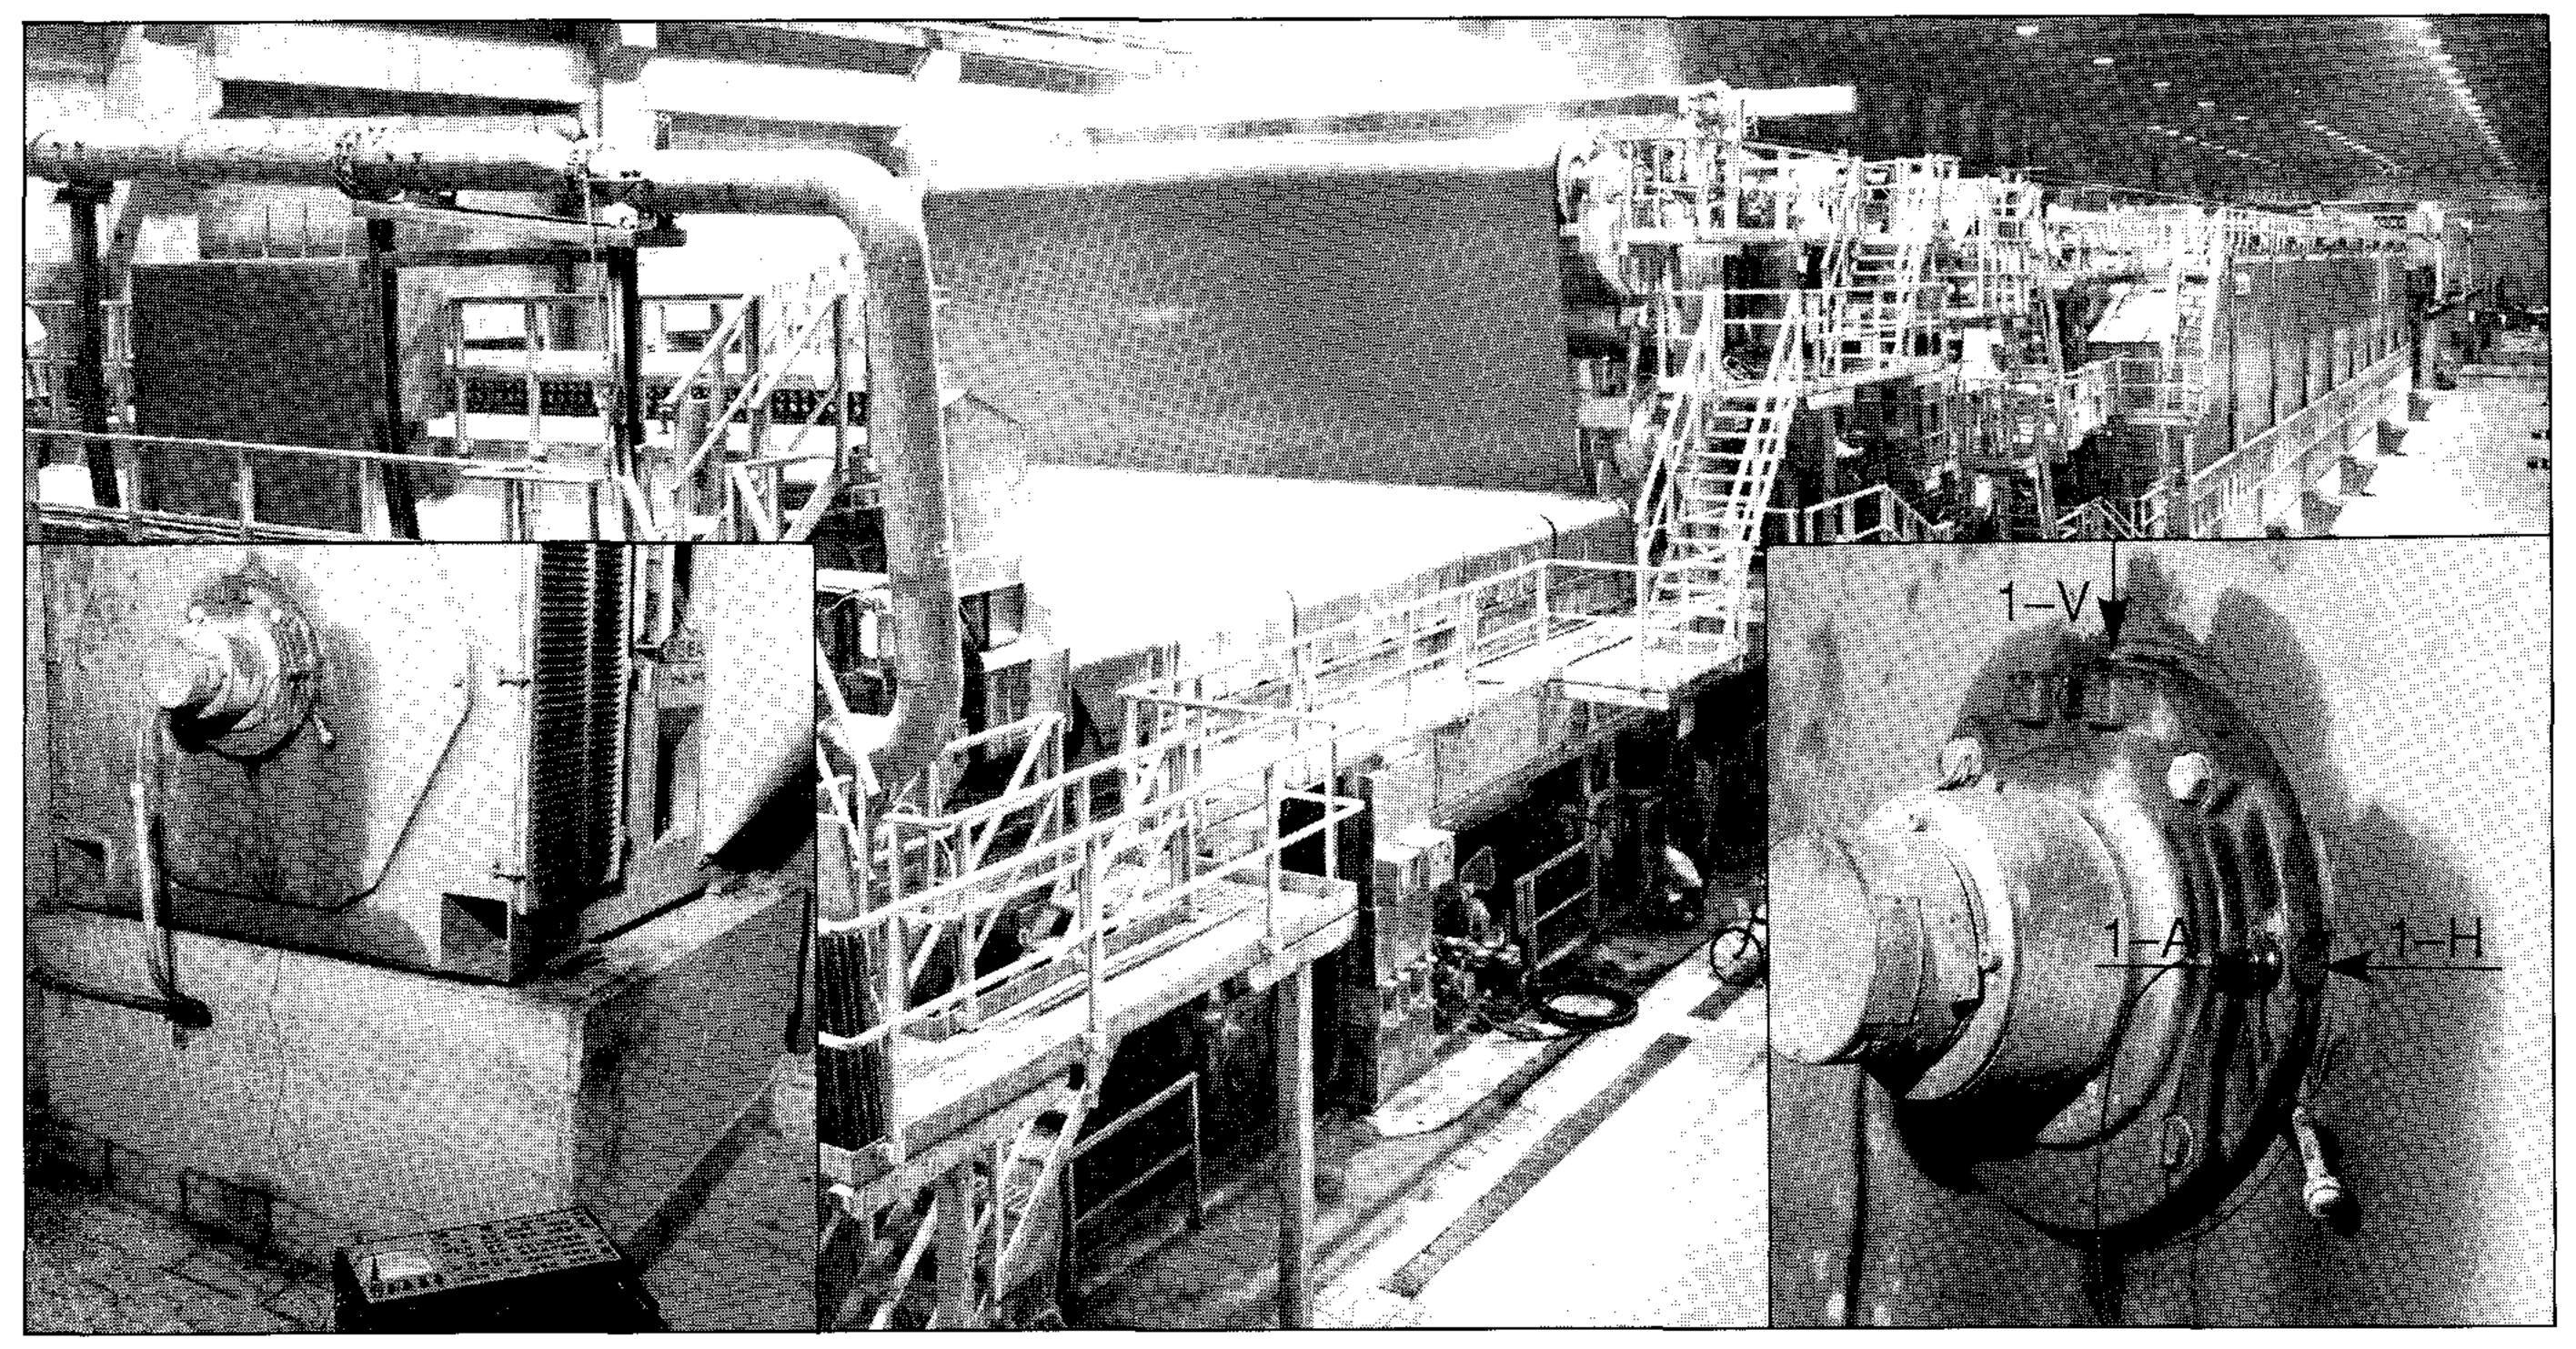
An example of a route (PM1), a machine (PM1-05), and measurement points (1-A, 1-H and 1-V). The route is at paper machine no. 1, the machines are the electric motors at the driving side, and the measurement points are vertical, horizontal and axial on the outer bearing housing
